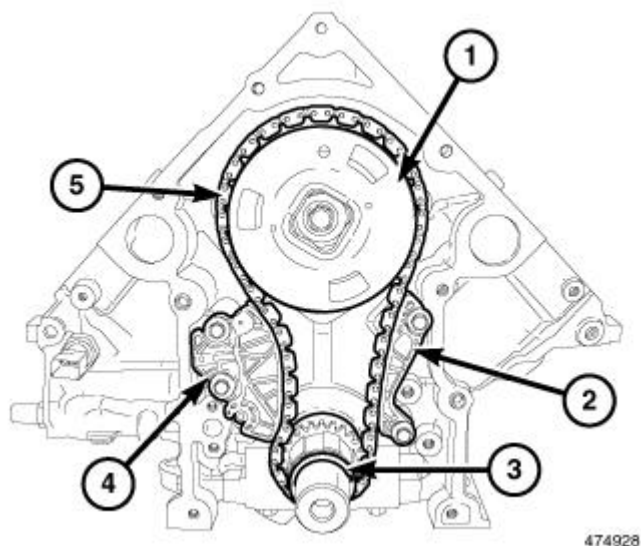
Timing Chain, Sprockets, Timing Chain Tensioner & Guide
